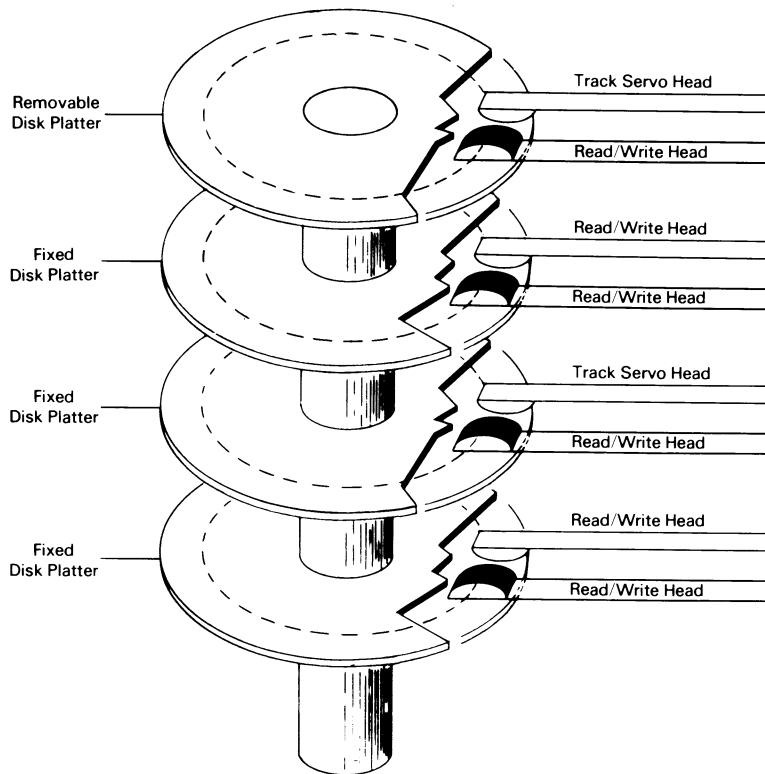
Model 2280/2280N Disk Unit Read/Write Heads
